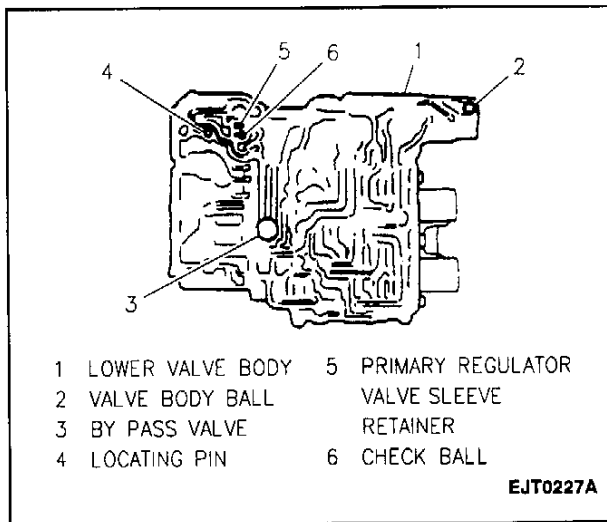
Inspecting Lower Valve Body Assembly (03-72LE, 4-Speed)
